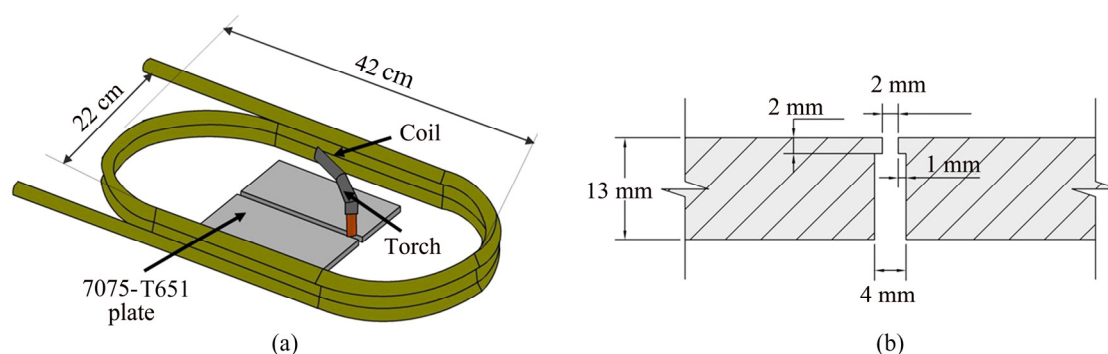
Experimental set-up (a) and MIEA welding groove configuration (b)
